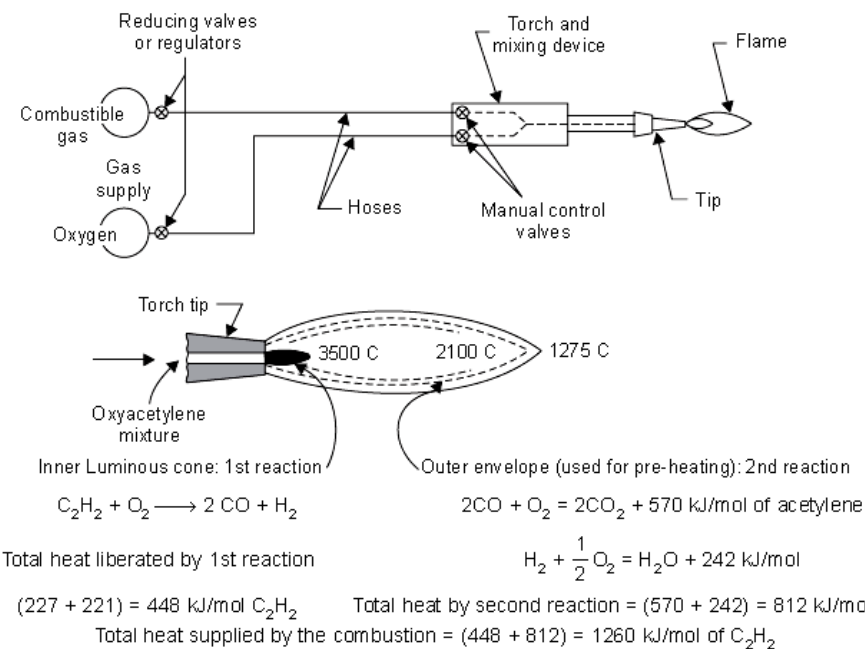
Schematic sketch of oxyacetylene welding torch and gas supply [1].
